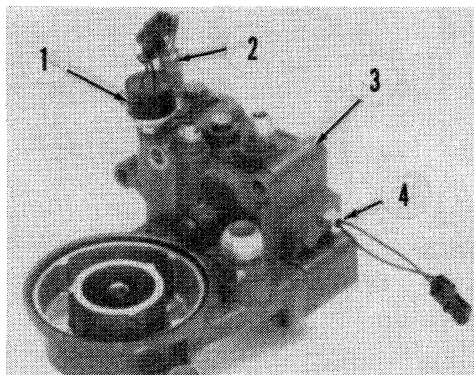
Gage cluster sensors are located on oil filter relief valve housing on tractors with Quad-Range transmission.
